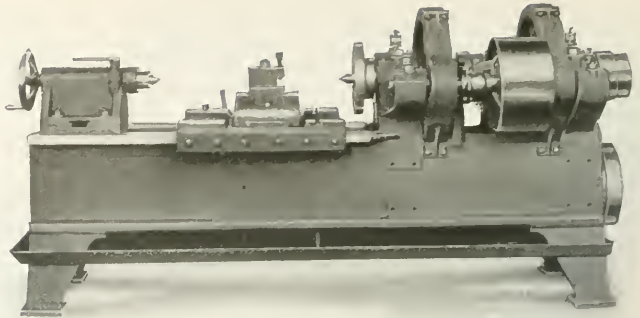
Opposite Side of Johnston & Jennings Lathe, showing Arrangement of Single Pulley Drive
